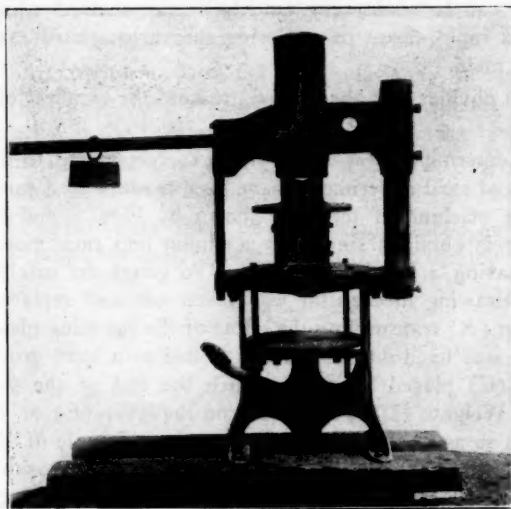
(UPPER), FIG. 4 (LOWER)—SQUEEZER MACHINE RIGGED FOR MOLD HARDNESS TESTS
